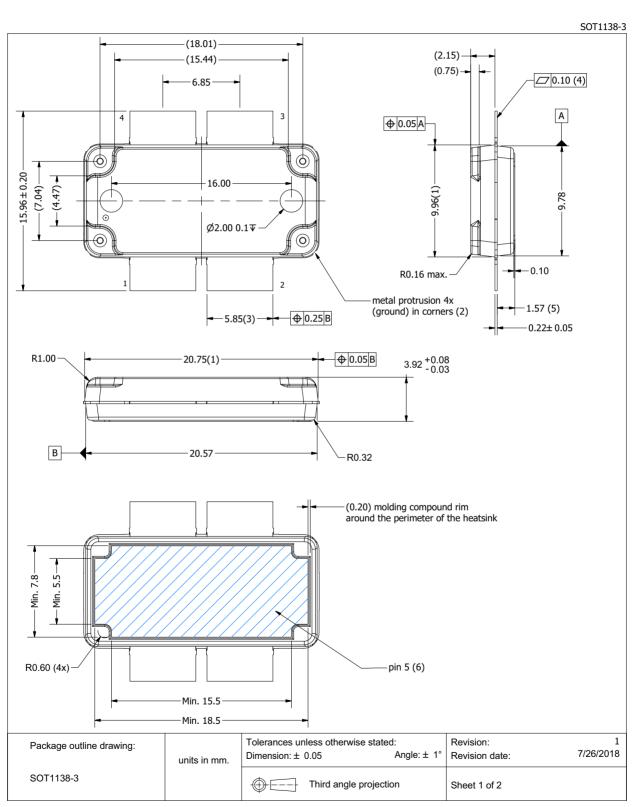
Package outline SOT1138-3 (sheet 1 of 2)
